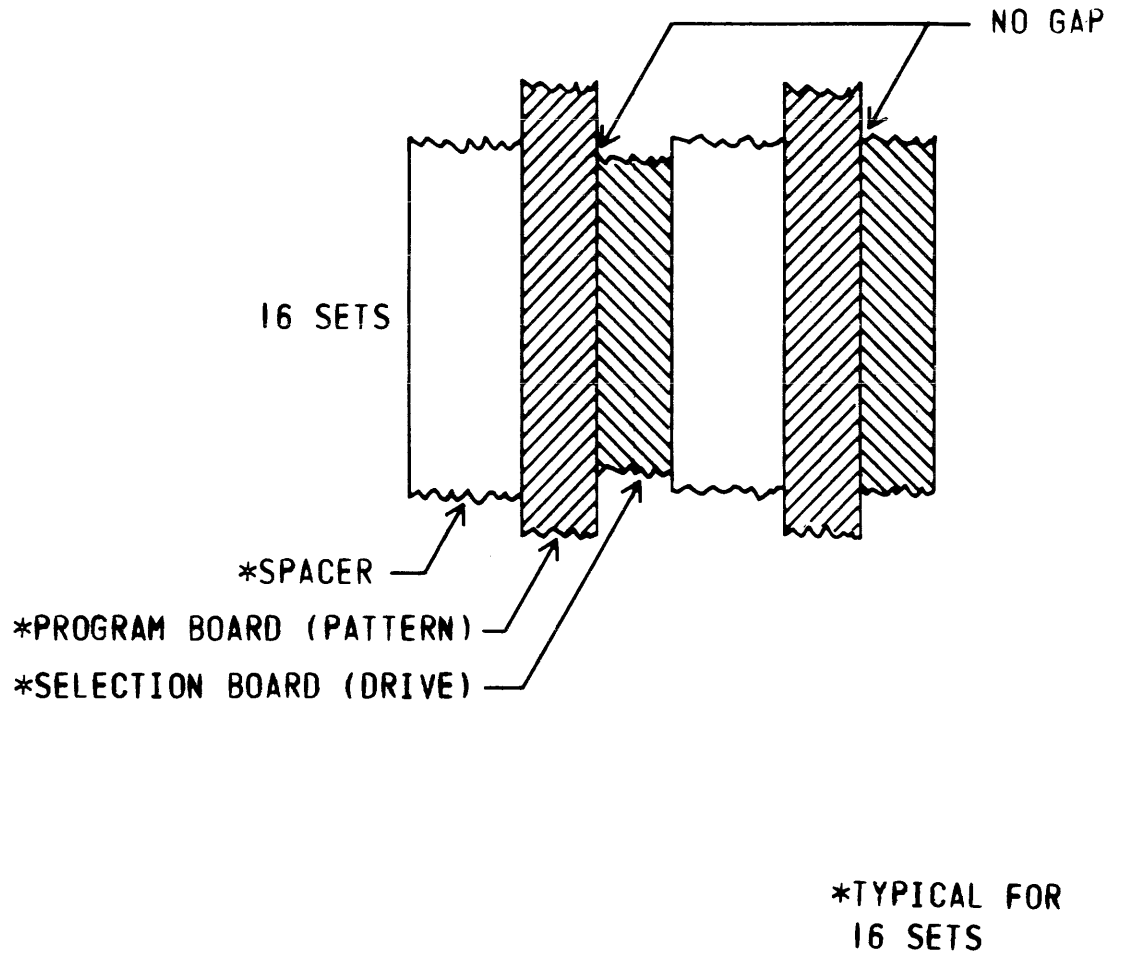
ROM STACKING ASSEMBLY, FRONT VIEW
